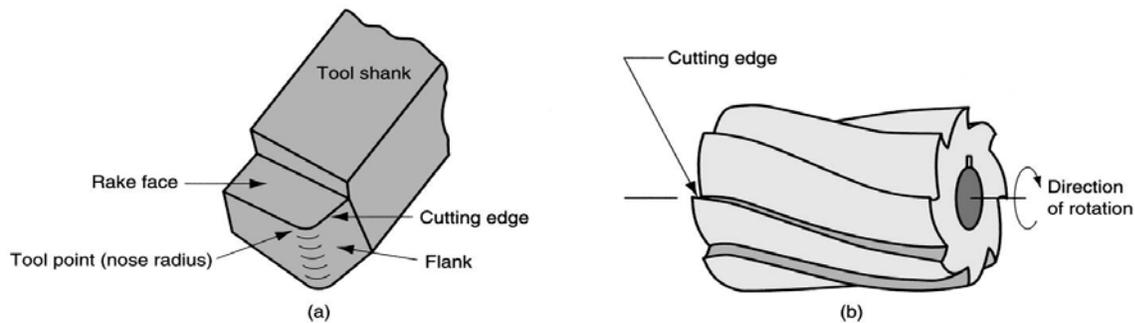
(a) A single-point tool showing rake face, flank, and tool point; and (b) a helical milling cutter, representative of tools with multiple cutting edges.
